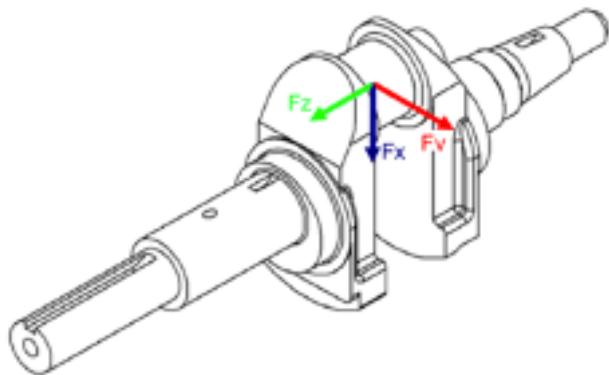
Crankshaft geometry and bending (F_x), torsional (F_y), and longitudinal (F_z) force directions
